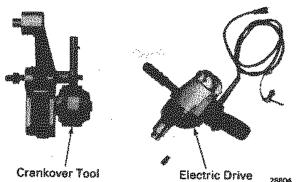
Crankover Tool 9561844 And Electric Drive Unit 9543867
